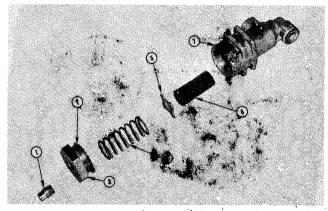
AIR CLEANER, EXPLODED 1. Plug 3. Cap 5. Spider 7. Body 2. Gasket 4. Spring 6. Element
